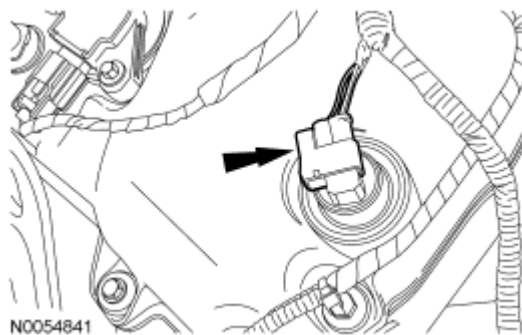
Locating RH Variable Camshaft Timing (VCT) Solenoid Electrical Connector
